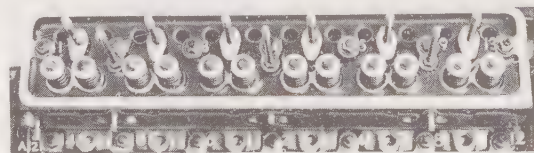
28 Cylinder head nut tightening and slackening sequence, 6-cylinder.
